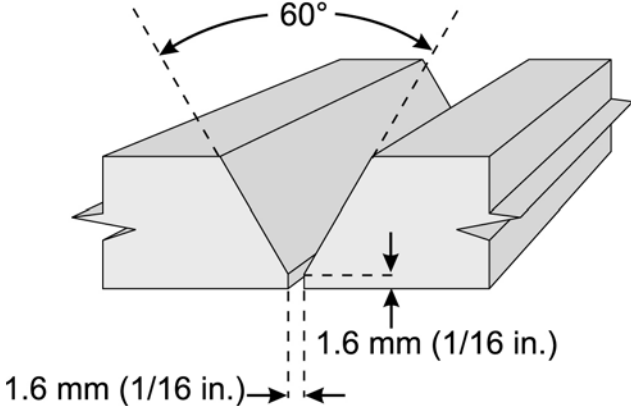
Drawing of the Simulated Pipe Joint (SPJ) Used in this Investigation
